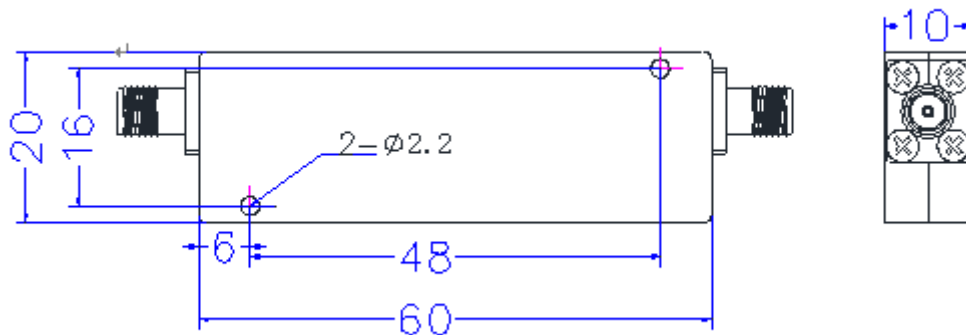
JX-HPF1-1G18G-60SF front panel layout
